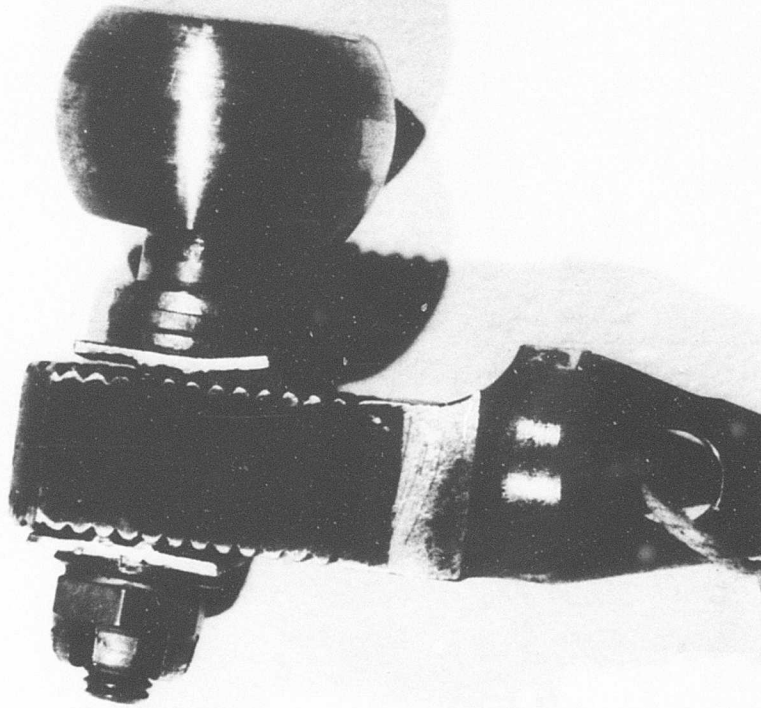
Upper Aft Roller Assembly Showing Deformation of Serrated Washer and Wear Pattern on Roller.
